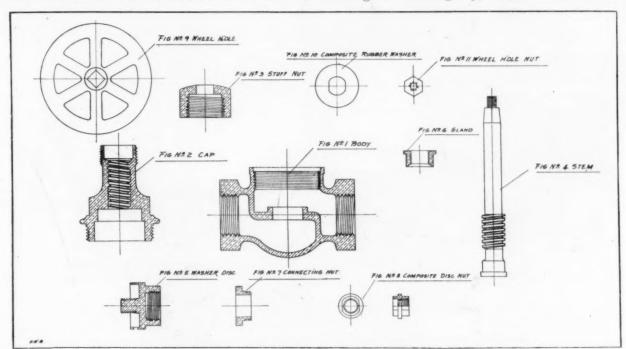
PLATE I. SKETCHES OF THE DETAILS OF A 34-INCH JENKINS OR COMPOSITE DISC STEAM VALVE GUARANTEED TO STAND A PRESSURE OF 200 POUNDS.
